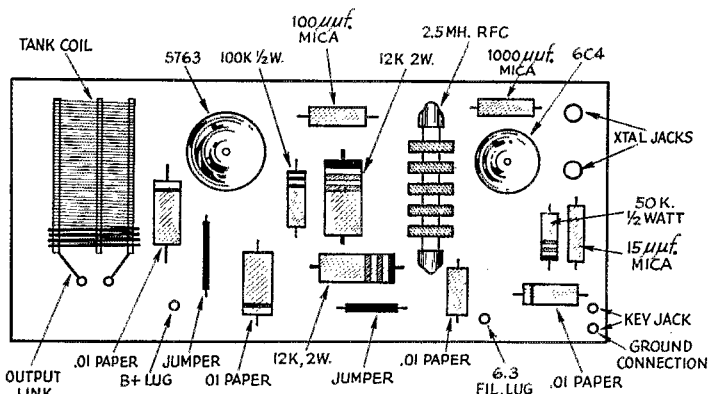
Top pictorial view of component placement layout. This should be drawn on semitransparent paper so wiring layout can be added to the underside of the drawing.
